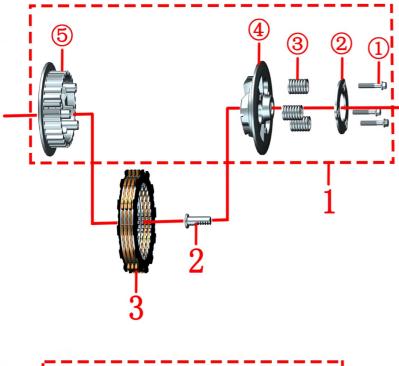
RIGHT CRANKCASE COVER ASSEMBLY		Clutch assembly-1	CHK	Q
